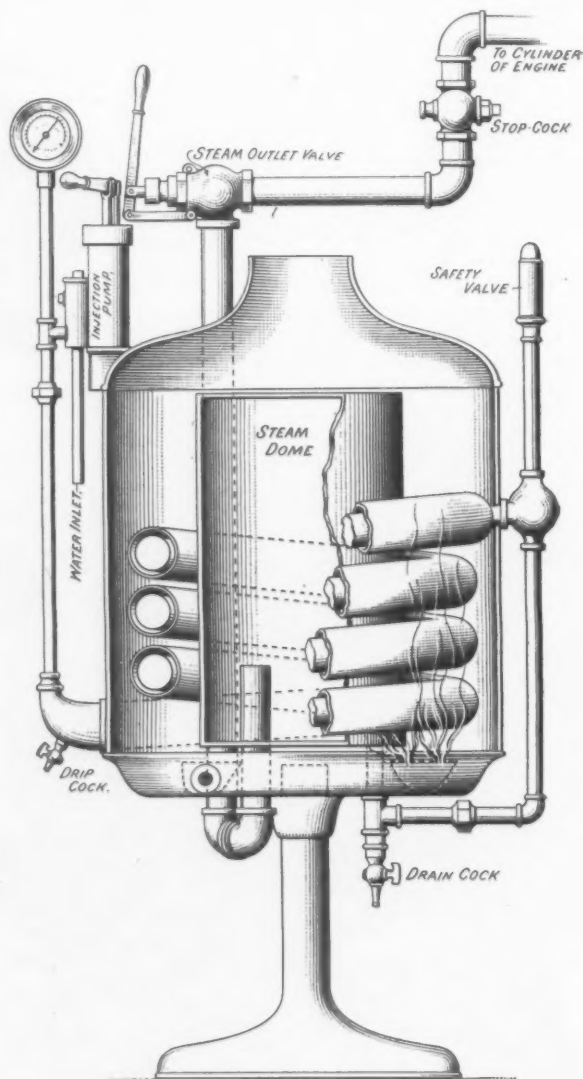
Sectional View of the Oil City Gas Engine Starter.
